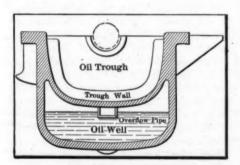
Form of transverse section through crankcase of splash lubricated motor
